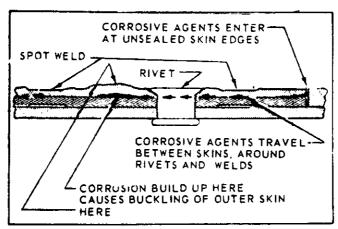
Spot-Welded Skin Corrosion Points
